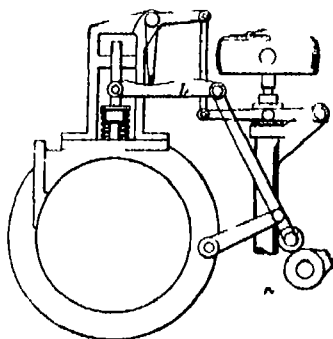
OTTO-DEUTZ MOVABLE FULCRUM GEAR
